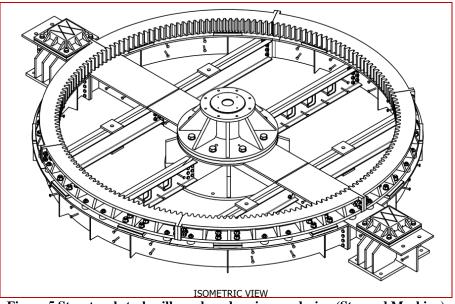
Structural steel grillage shop drawing rendering (Steward Machine)
